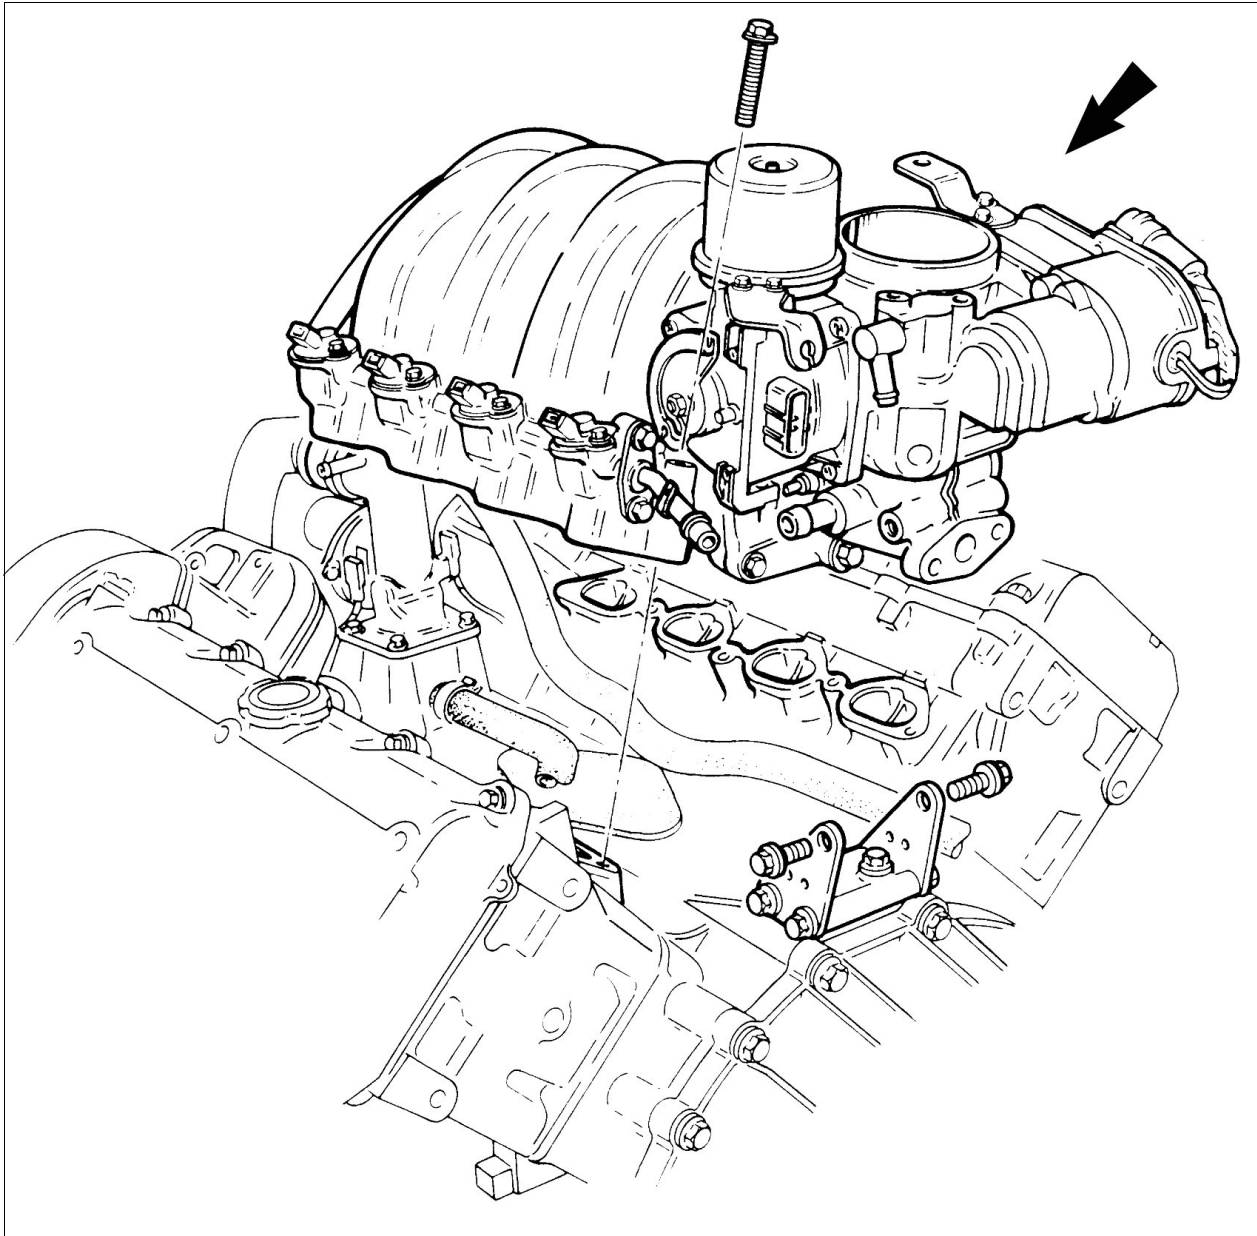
THROTTLE ASSEMBLY - AJ26 N/A
